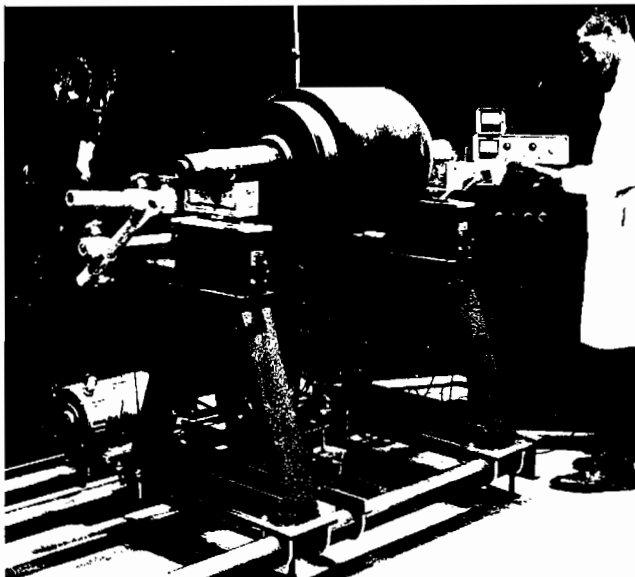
Rotors Which Can Not be Balanced In-place are Balanced in a Balancing Machine.
